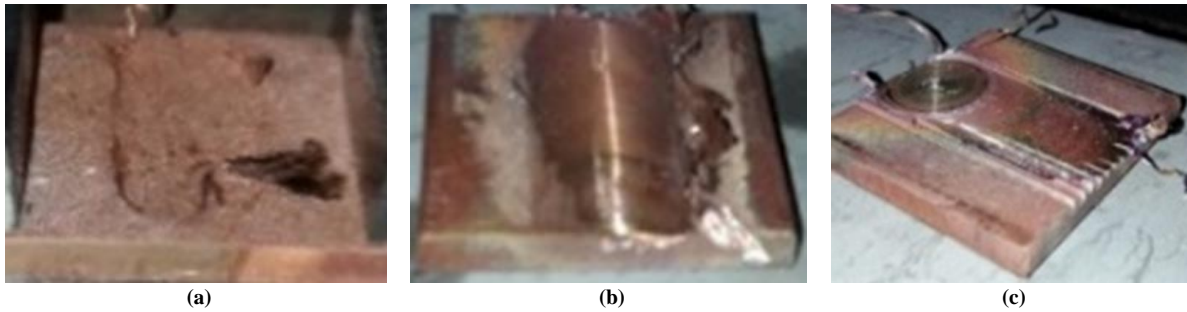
Image of welded parts after powder injection. (a) low depth and high width, (b) low depth and low width, (c) surface scratches.
